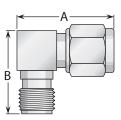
(Right angle plug-jack; connects one plug and one jack)
